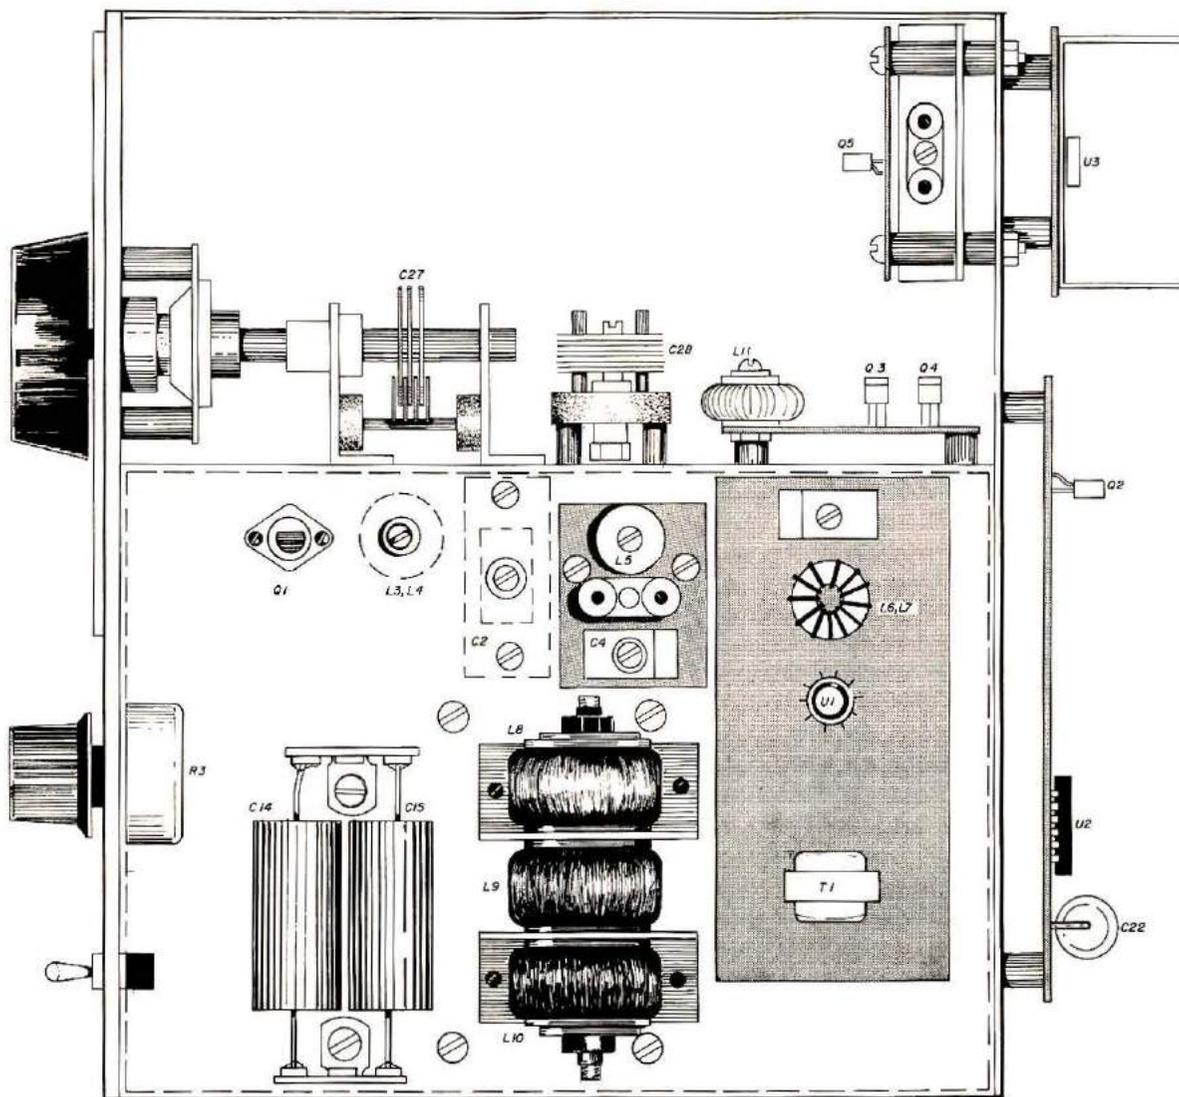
This top view of my receiver layout will help you plan the parts placement for the one you build. Try the parts and circuit boards for size before you start drilling the chassis. If you use a larger chassis, be sure to keep the area around the VFO tuning capacitor (C27) clear.
